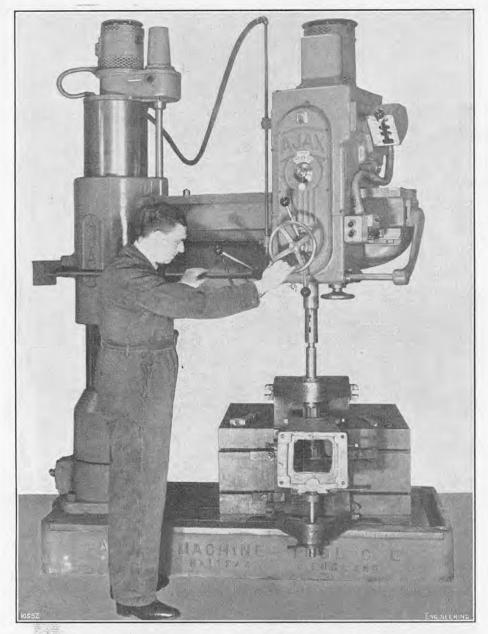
RADIAL DRILLING, BORING AND TAPPING MACHINE; AJAX MACHINE TOOL CO., LTD.
